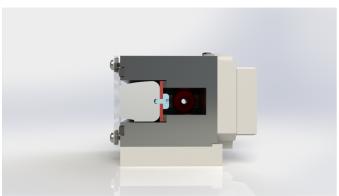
Render of cross-section of assembled camera enclosure with camera inside
